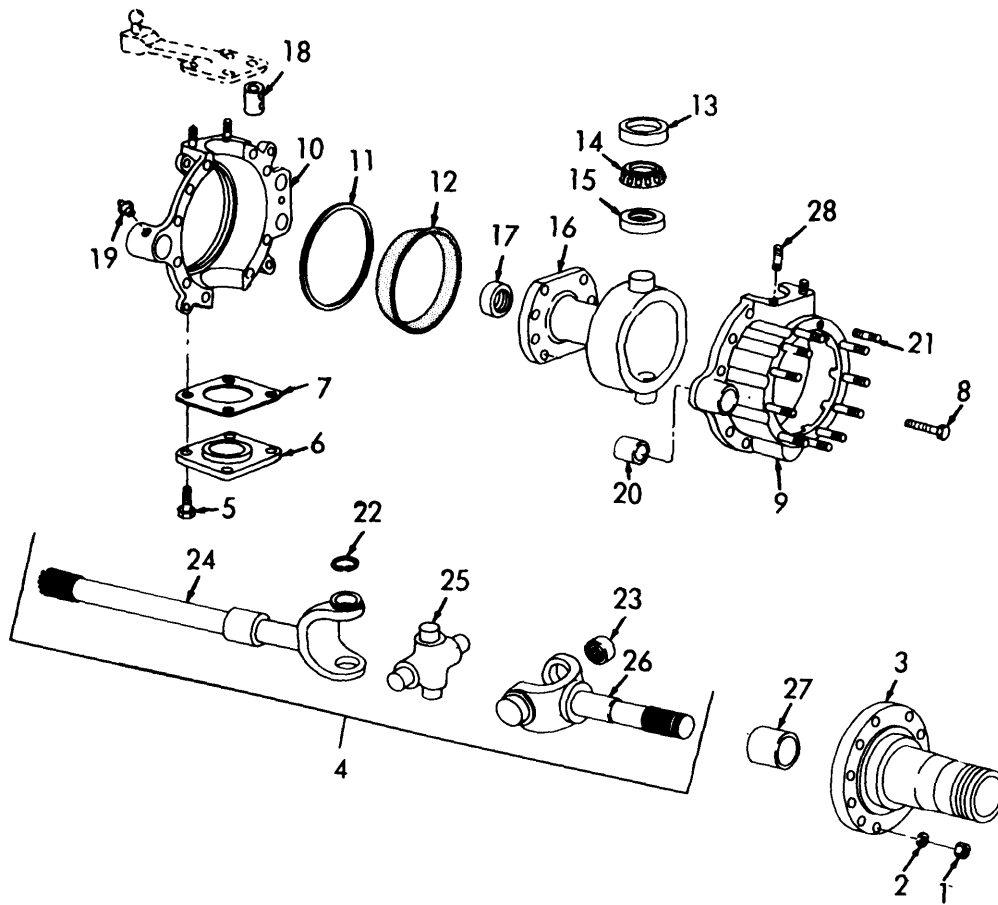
Carrie steering knuckle and shaft assembly, removal and installation.
